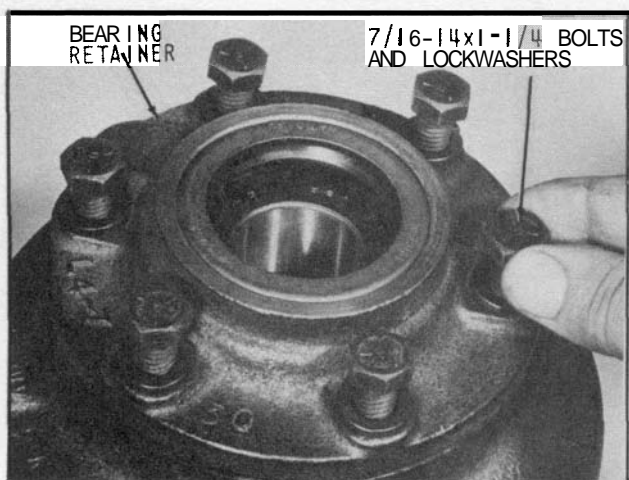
Installing the Six 7/16 Hex Head Bolts and Lockwashers
